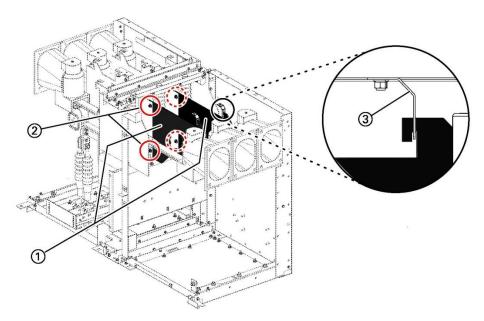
Mounting the central insulating plates, panel width 800 mm
